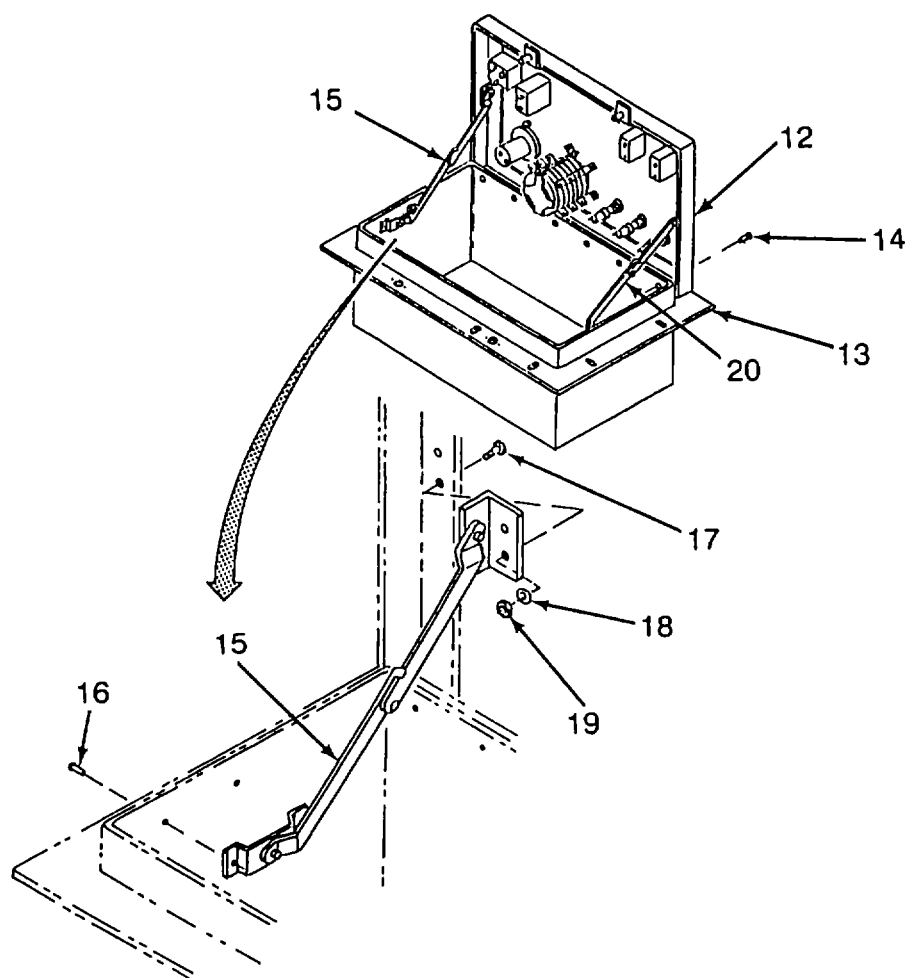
Control Box Assembly (Sheet 2 of 2)
